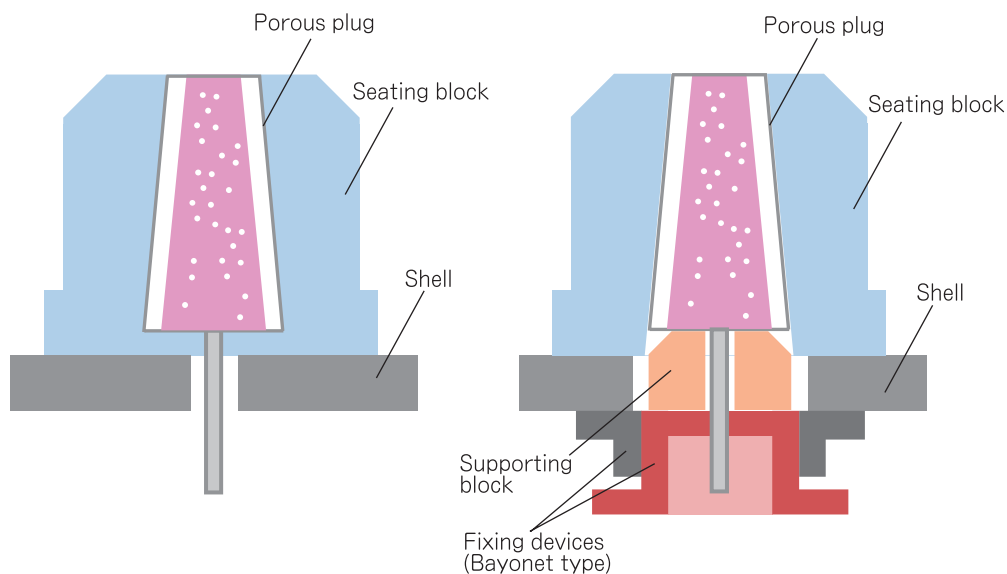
Schematic diagrams of porous plug assemblies mounted on the bottom of ladles.
